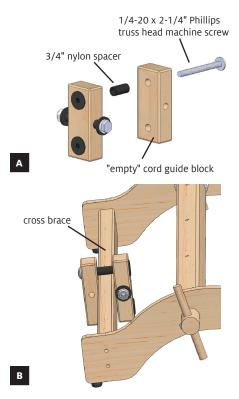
ATTACH CORD GUIDE BLOCKS
